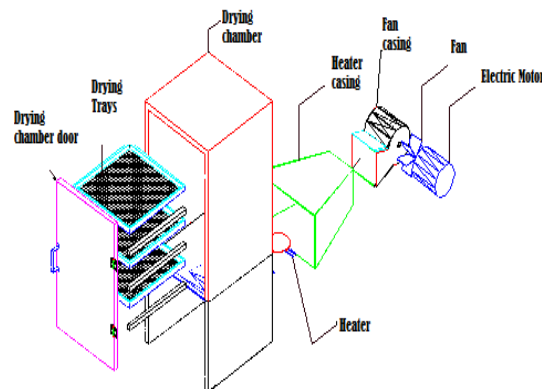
Exploded View of the Mechanical Dryer showing the Component Parts
